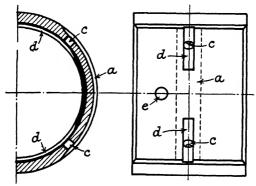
A.E.C. CENTRE CRANKSHAFT BEARING (No. 4)
